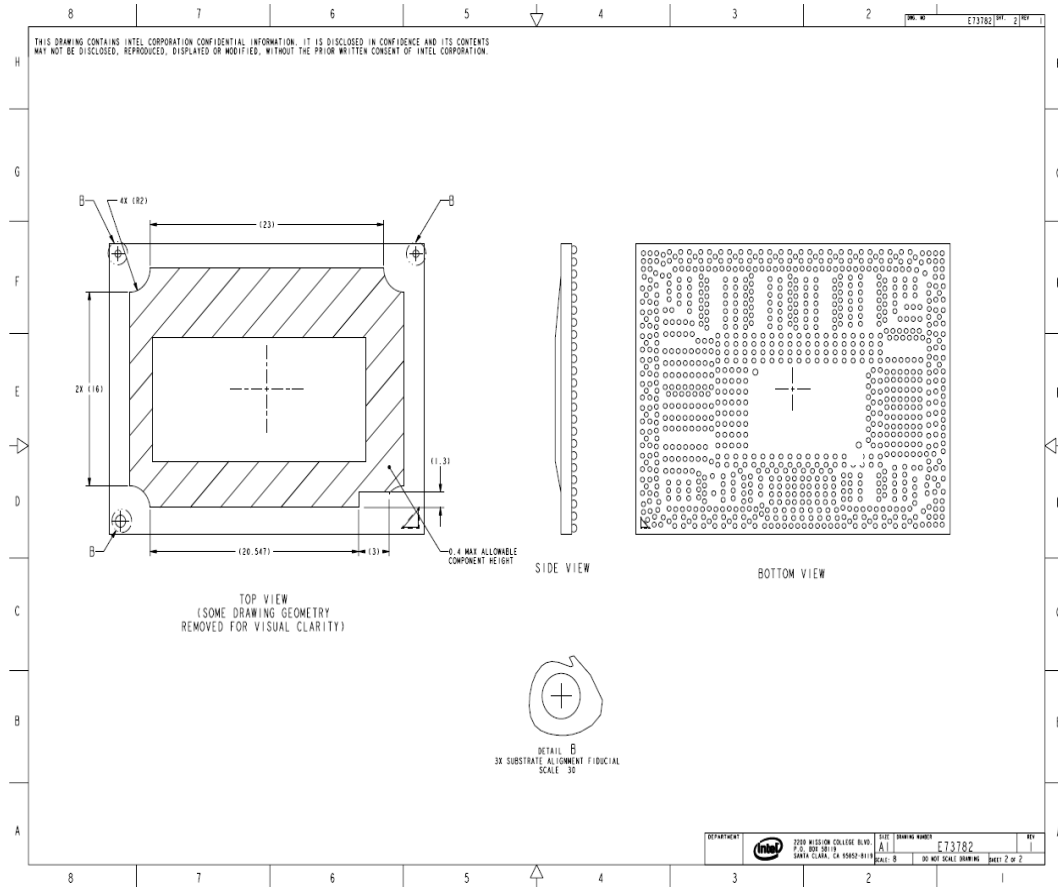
Sandy Bridge-Mbl Two-Core-Die 1023 Ball BGA Package Mechanical Drawing 1
